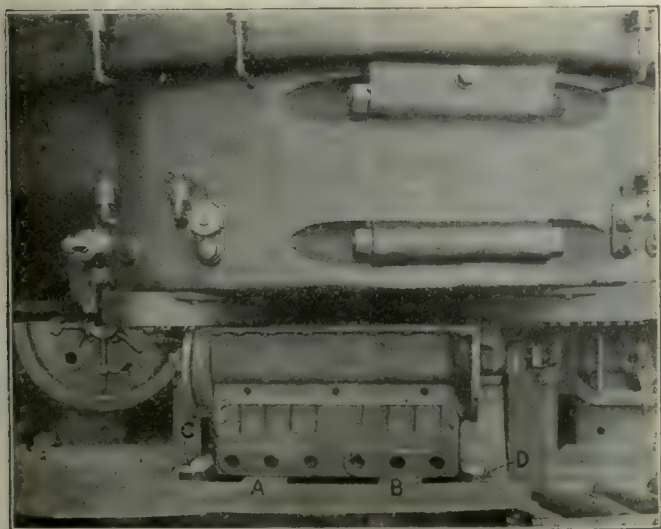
FACING THE BOTTOM FLANGE ON CONTINUOUS MILLING MACHINE
